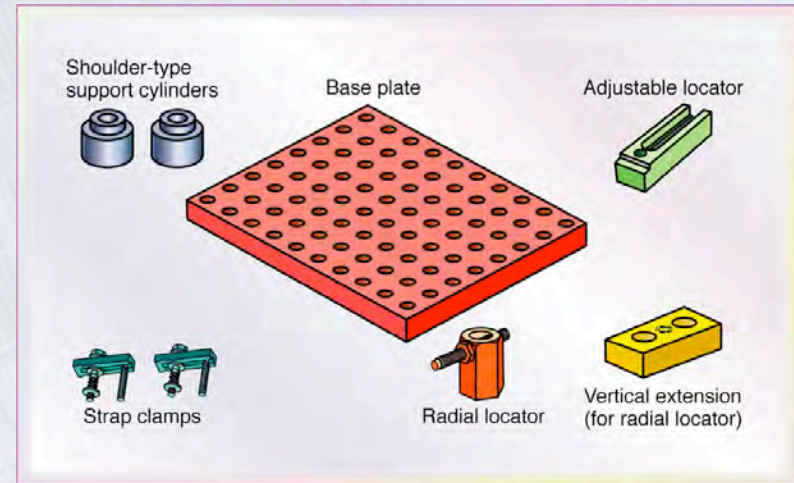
Modular components used to construct the fixture for CNC machining of the cast-iron housing depicted in Fig. 37.27.
